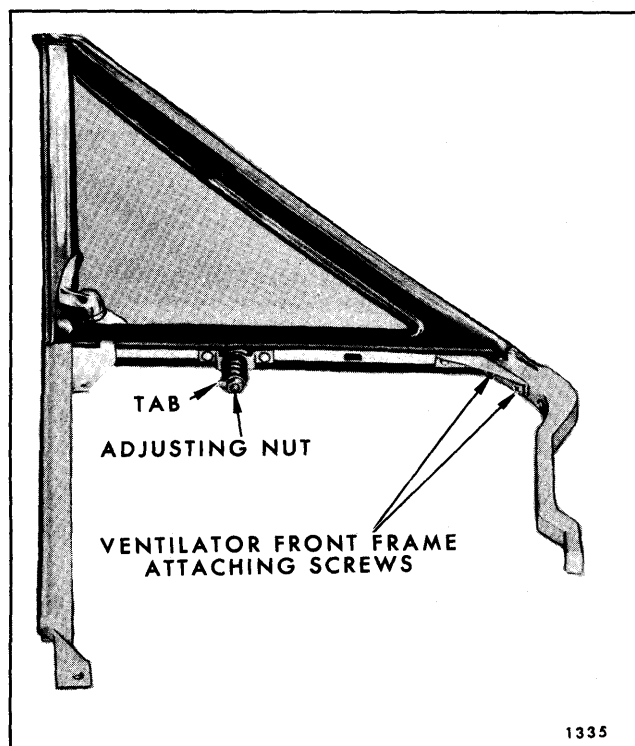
Front Door Ventilator Assembly - "X & Z" Styles
